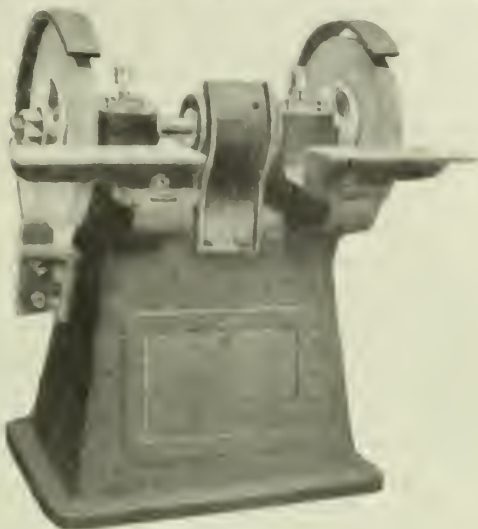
A DOUBLE GRINDING MACHINE, SPECIALLY DESIGNED FOR FETTLING SHOPS.
